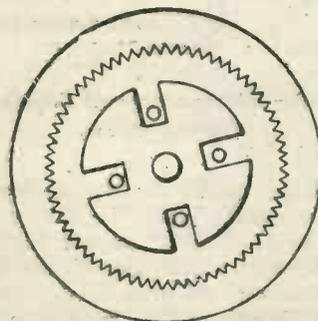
Showing how to attach a gear wheel to the underside of a condenser dial.
